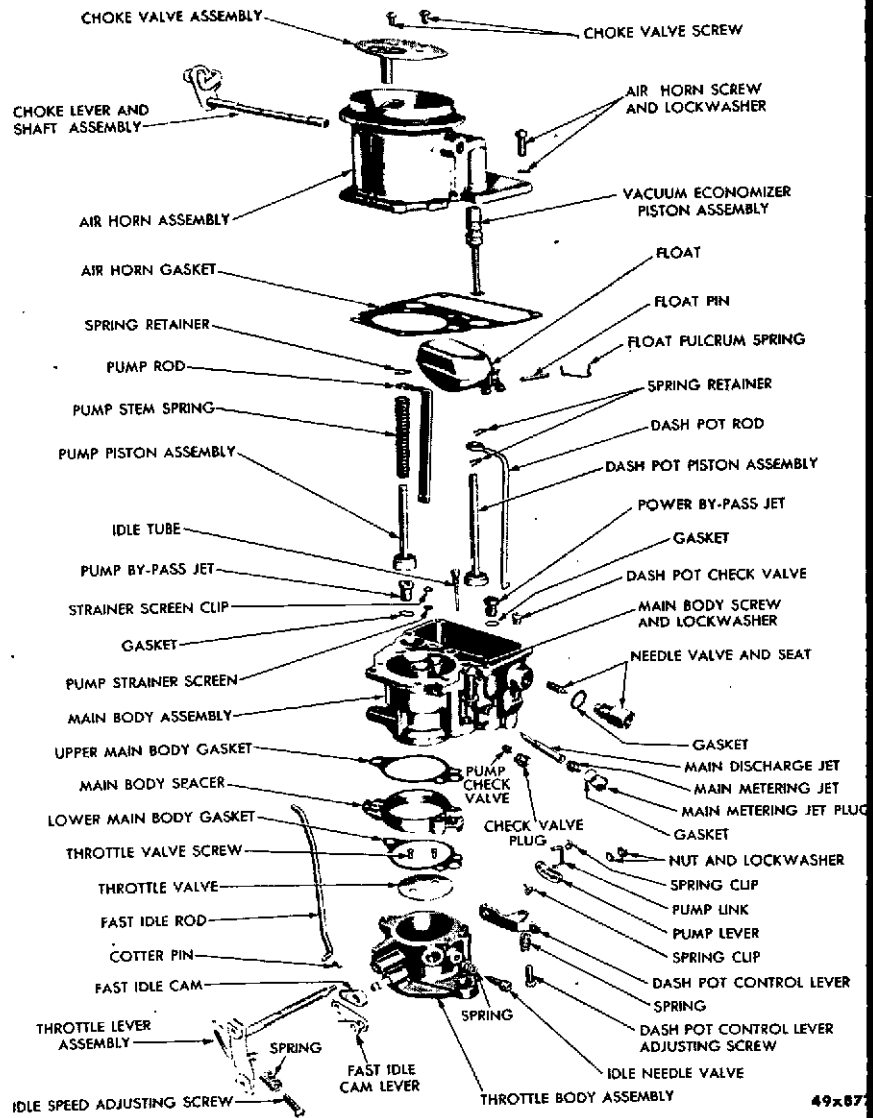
Downdraft Carburetor Used with Dash Pot and With Fluid Drive
